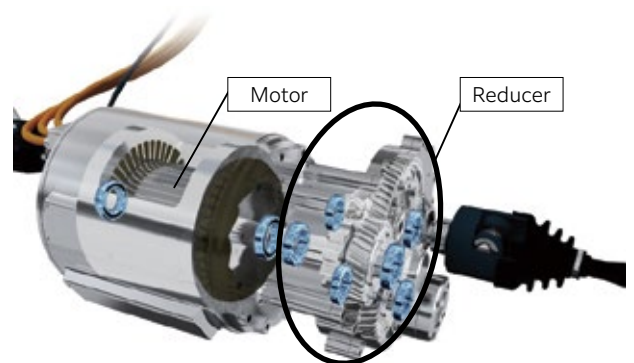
Example of e-Axle structure and arrangement of rolling bearings³⁾
